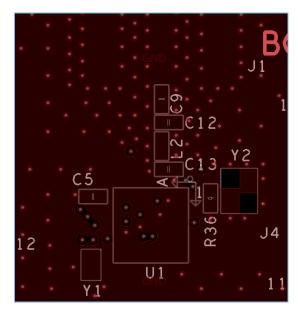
L2 design for 4-layer PCB (BGA68)
